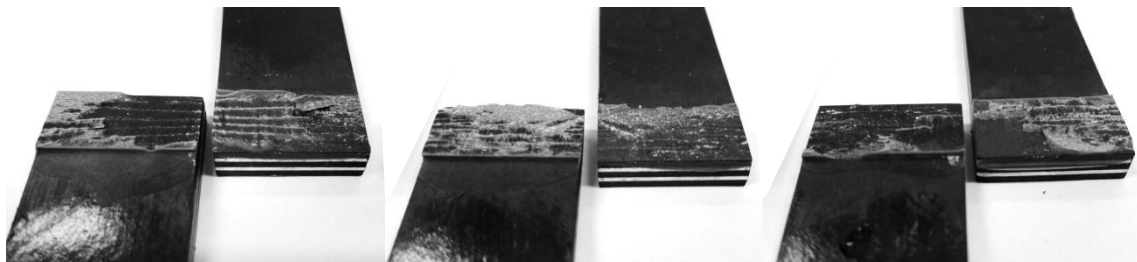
Failure surface of the single lap joints using CFRP-AL-CFRP-AL-CFRP-Type laminate (6.4 mm thickness)
